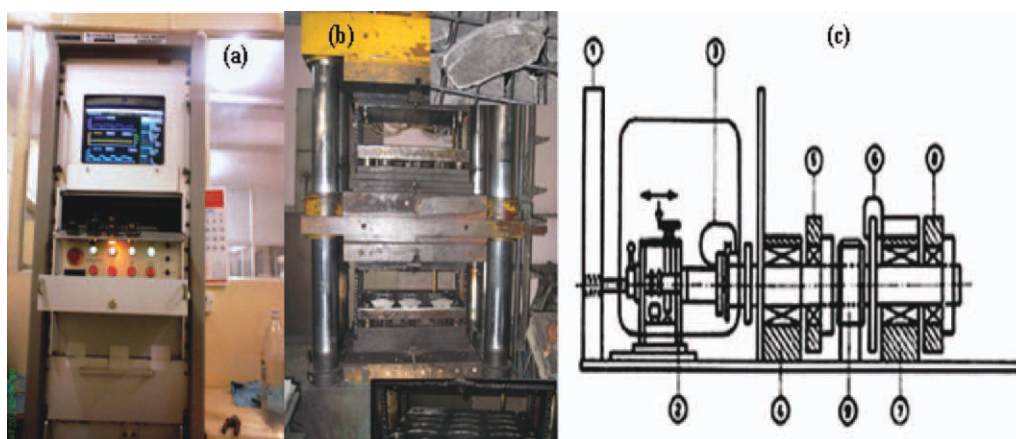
(a) Krauss friction testing machine: Computer interfaced data acquisition system [Automatic measuring equipment and test bench, D-T141 MURR Germany]. (b) Compression molding machine (inserts) brake-pad and 12-cavity mold. (c) Schematic of Krauss test rig tribo-performance evaluation of brake pads (1) compressed air supply, (2) bearing movable, (3) air inlet, (4) bearings, (5) option SH 2.5 kg/m², (6) emergency stop option, (7) bearings, (8) options SH 5 kg/m², and (9) flywheels connected to DC motor housing through a belt drive with clutch option actuated by a generator.^{28,29}[Color figure can be viewed in the online issue, which is available at wileyonlinelibrary.com.]
